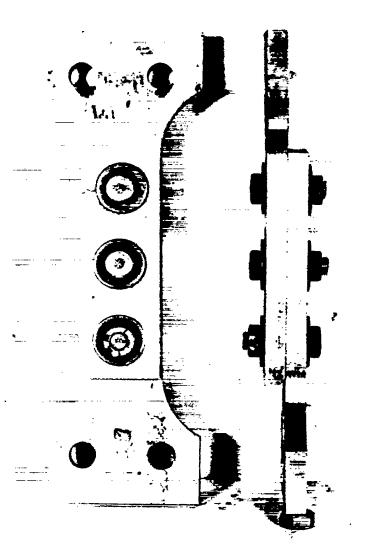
Fatigue failures of three-bolt joints in 0.375-inch sheet.
